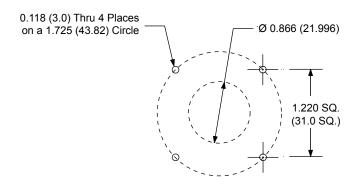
Mdrive linear actuator mounting and drill pattern
